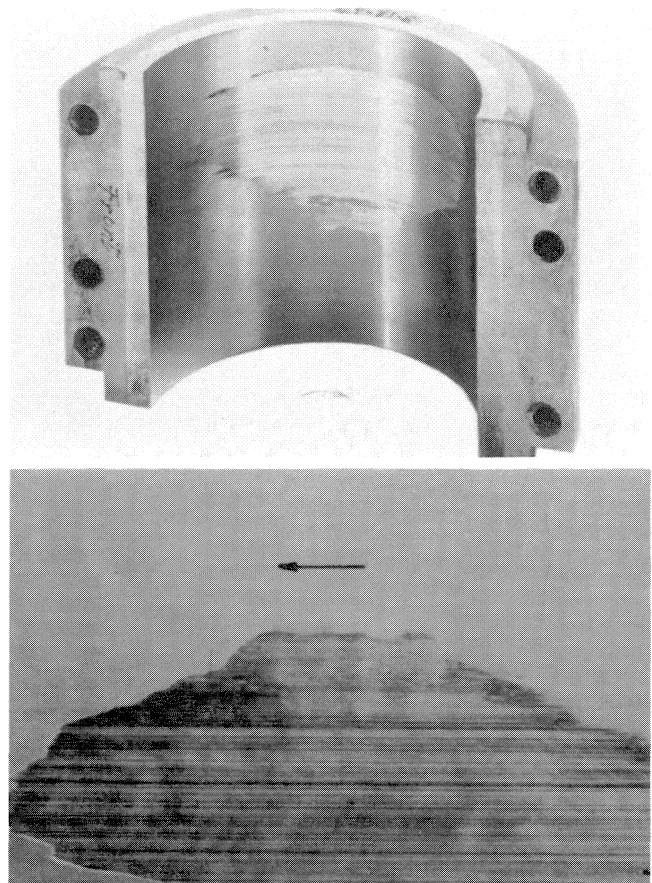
A Wiped 3.0 in (7.6 cm) Diameter Journal Bearing Wipe Due to Temporary Loss of Lubricant. (a) Loaded half of bearing. (b) Section of wipe.
